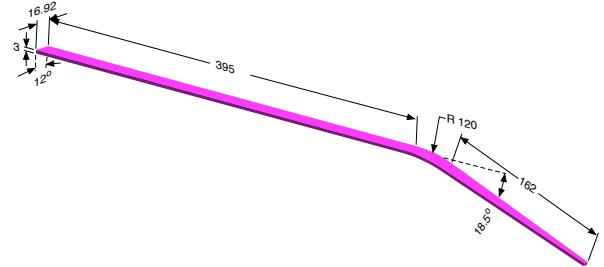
Start Counter single paddle geometry. Unlabeled dimensions shown are in mm.
